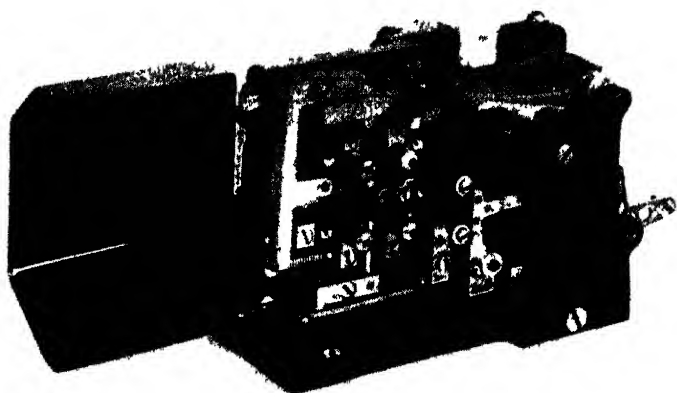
ONE FORM OF TRANSMITTING CAM SLEEVE ASSEMBLY.
